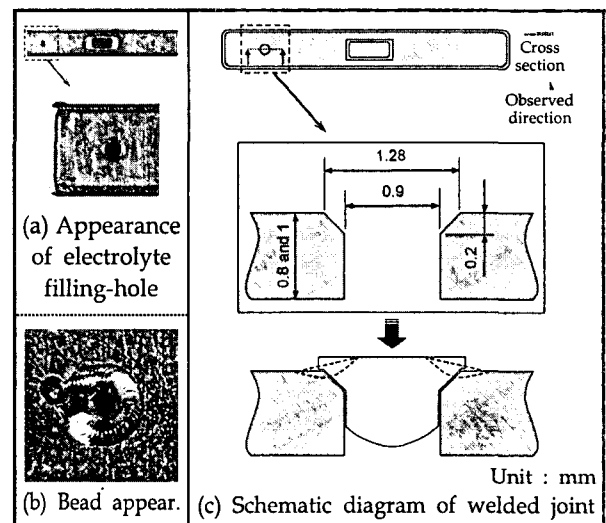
Appearance and schematic diagram of welded joint in ball-cap welding
